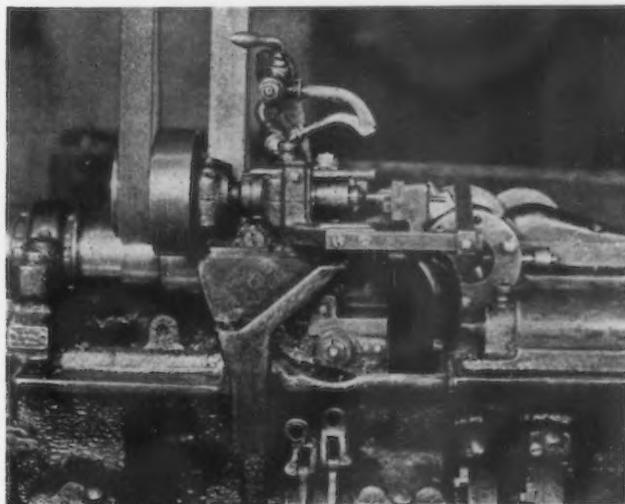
By means of an auxiliary attachment link pins with both ends recessed are produced automatically.
